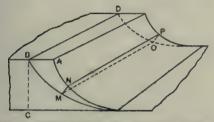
Metal Chip Assumed to be Produced by Milling Cutter Without distortion.
